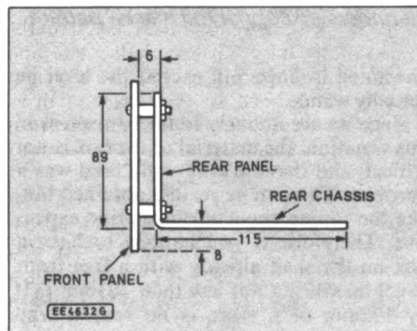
(above) Side view and measurements of the "front" mounting panel and rear chassis assembly.
